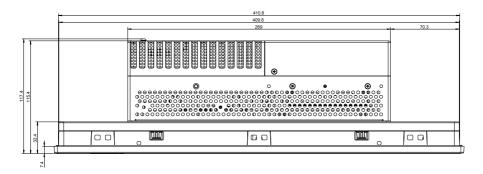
Housing dimensions of the device VR4x15, top view
